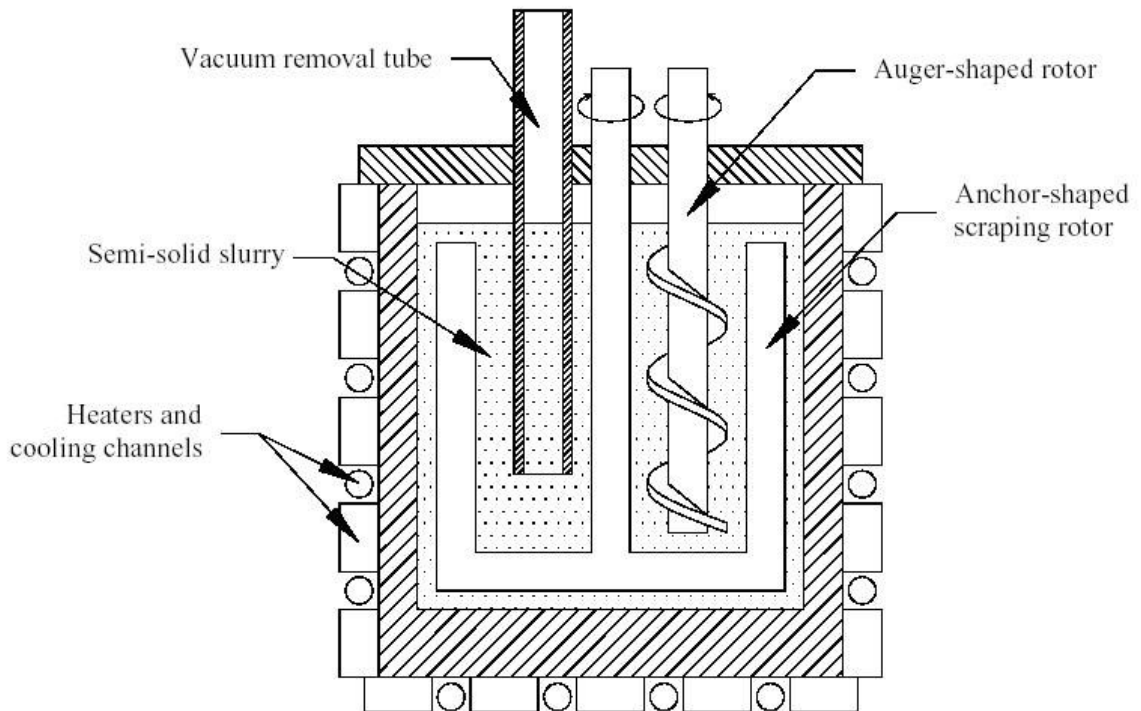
Schematic view of a mechanical stirring machine [21]
